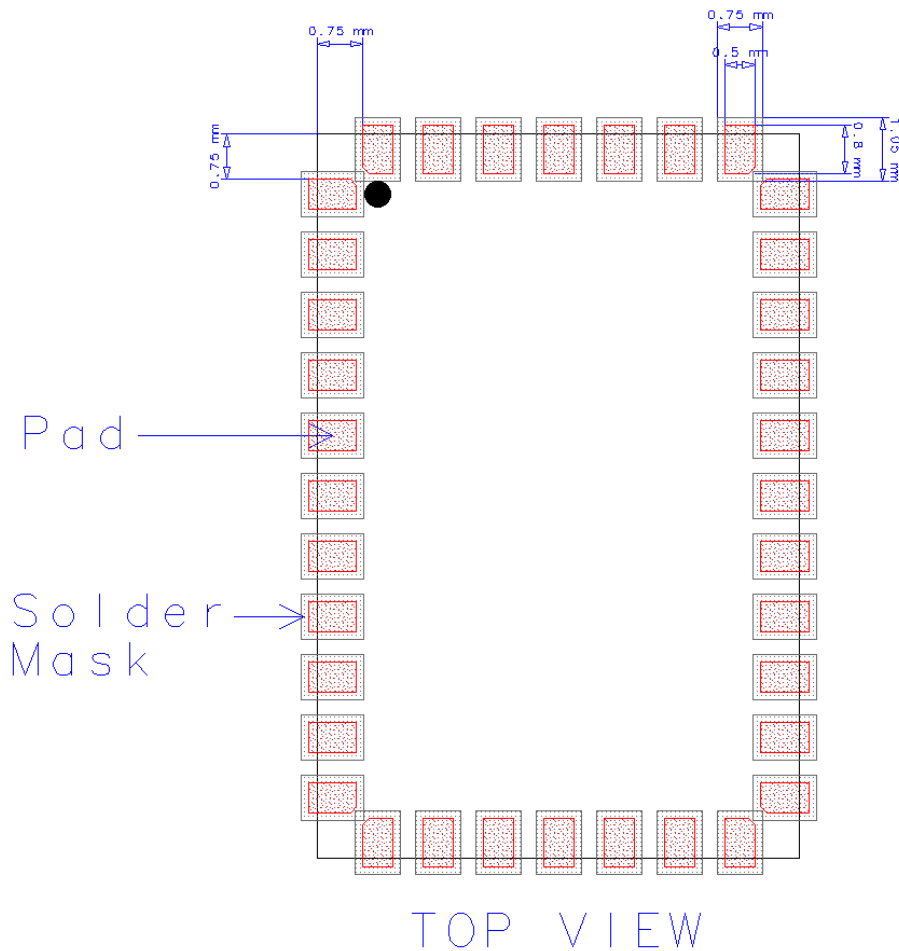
Recommended PCB Land Pattern and Solder Mask layout
